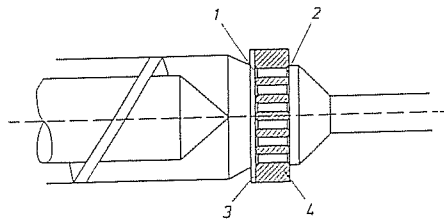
Example of a breaker plate assembly. 1 Inlet, 2 Outlet, 3 Screen pack, 4 Breaker plate
